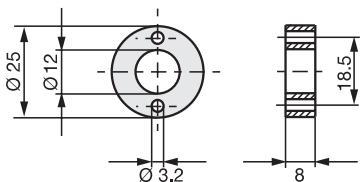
Installation dimensions of BTL-P-1012-4R magnet
